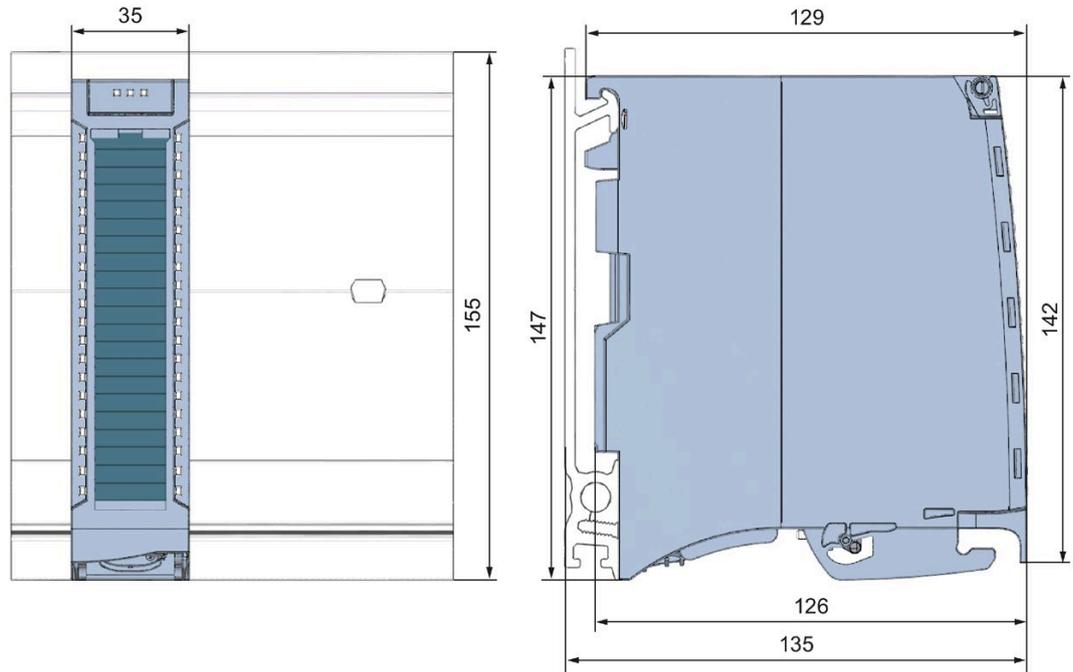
Dimensional drawing of the DI 16x24VDC HF module
